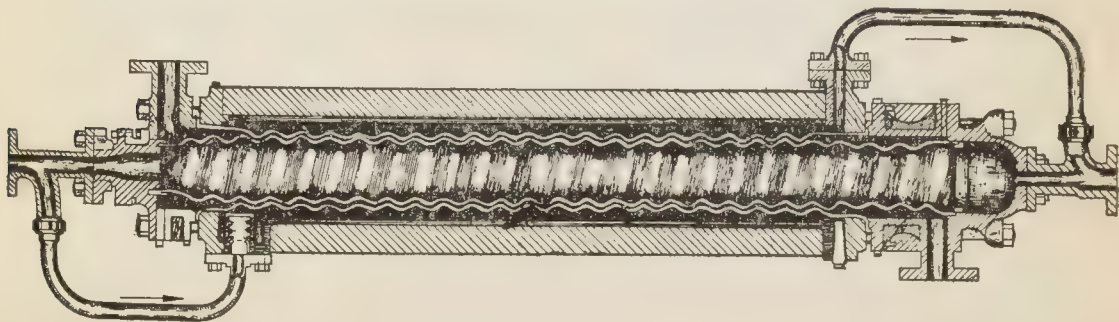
,936.—*Schutte and Koerting* film oil heater. In this heater (invented by Lovekin) oil is forced in a thin film between two steam heated surfaces of such shape that the oil is continually being mixed or stirred in passing through the heater.
